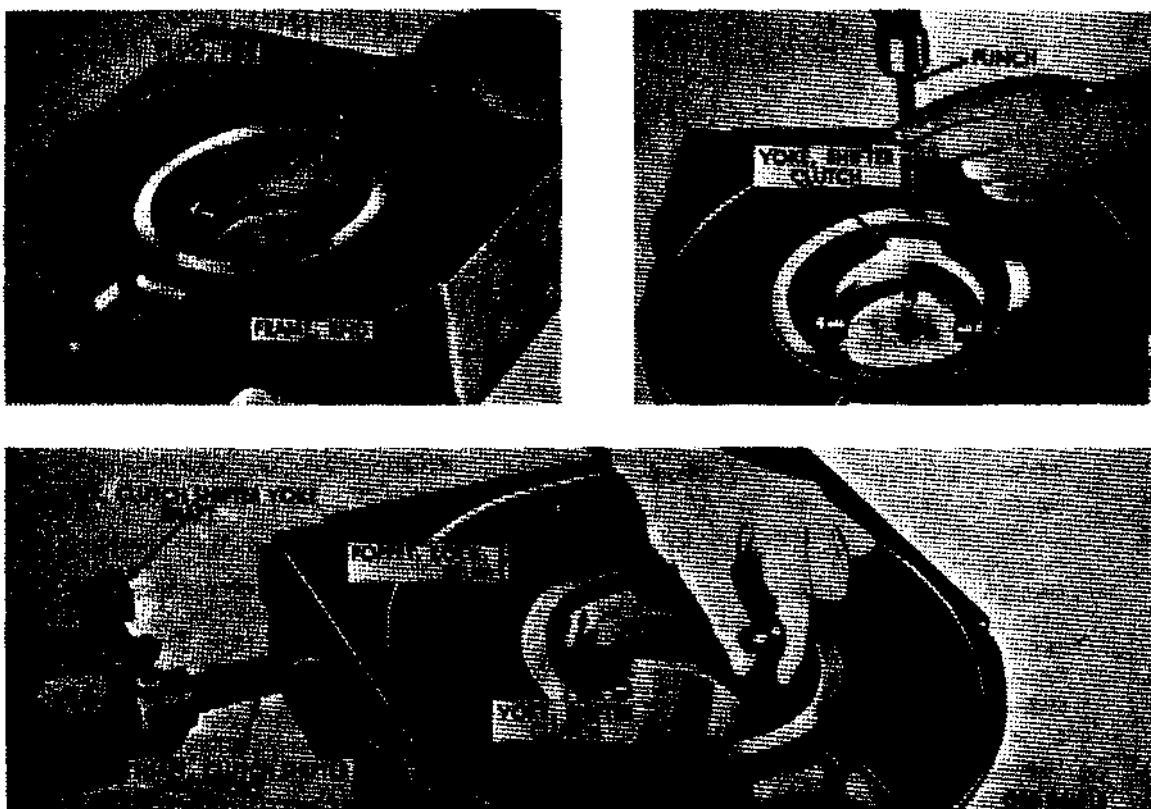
Removing clutch shifter yoke shaft and clutch shifter yoke
